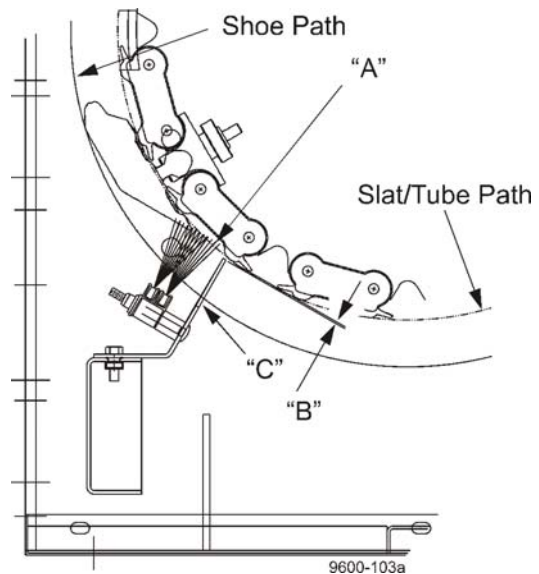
4 Adjustment of Brush / Mounting Bracket
